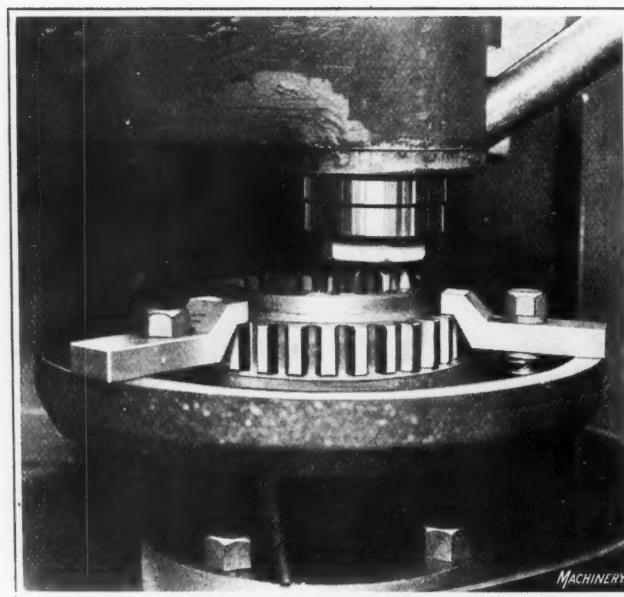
Cutting an Internal Gear on a Gear Shaper
